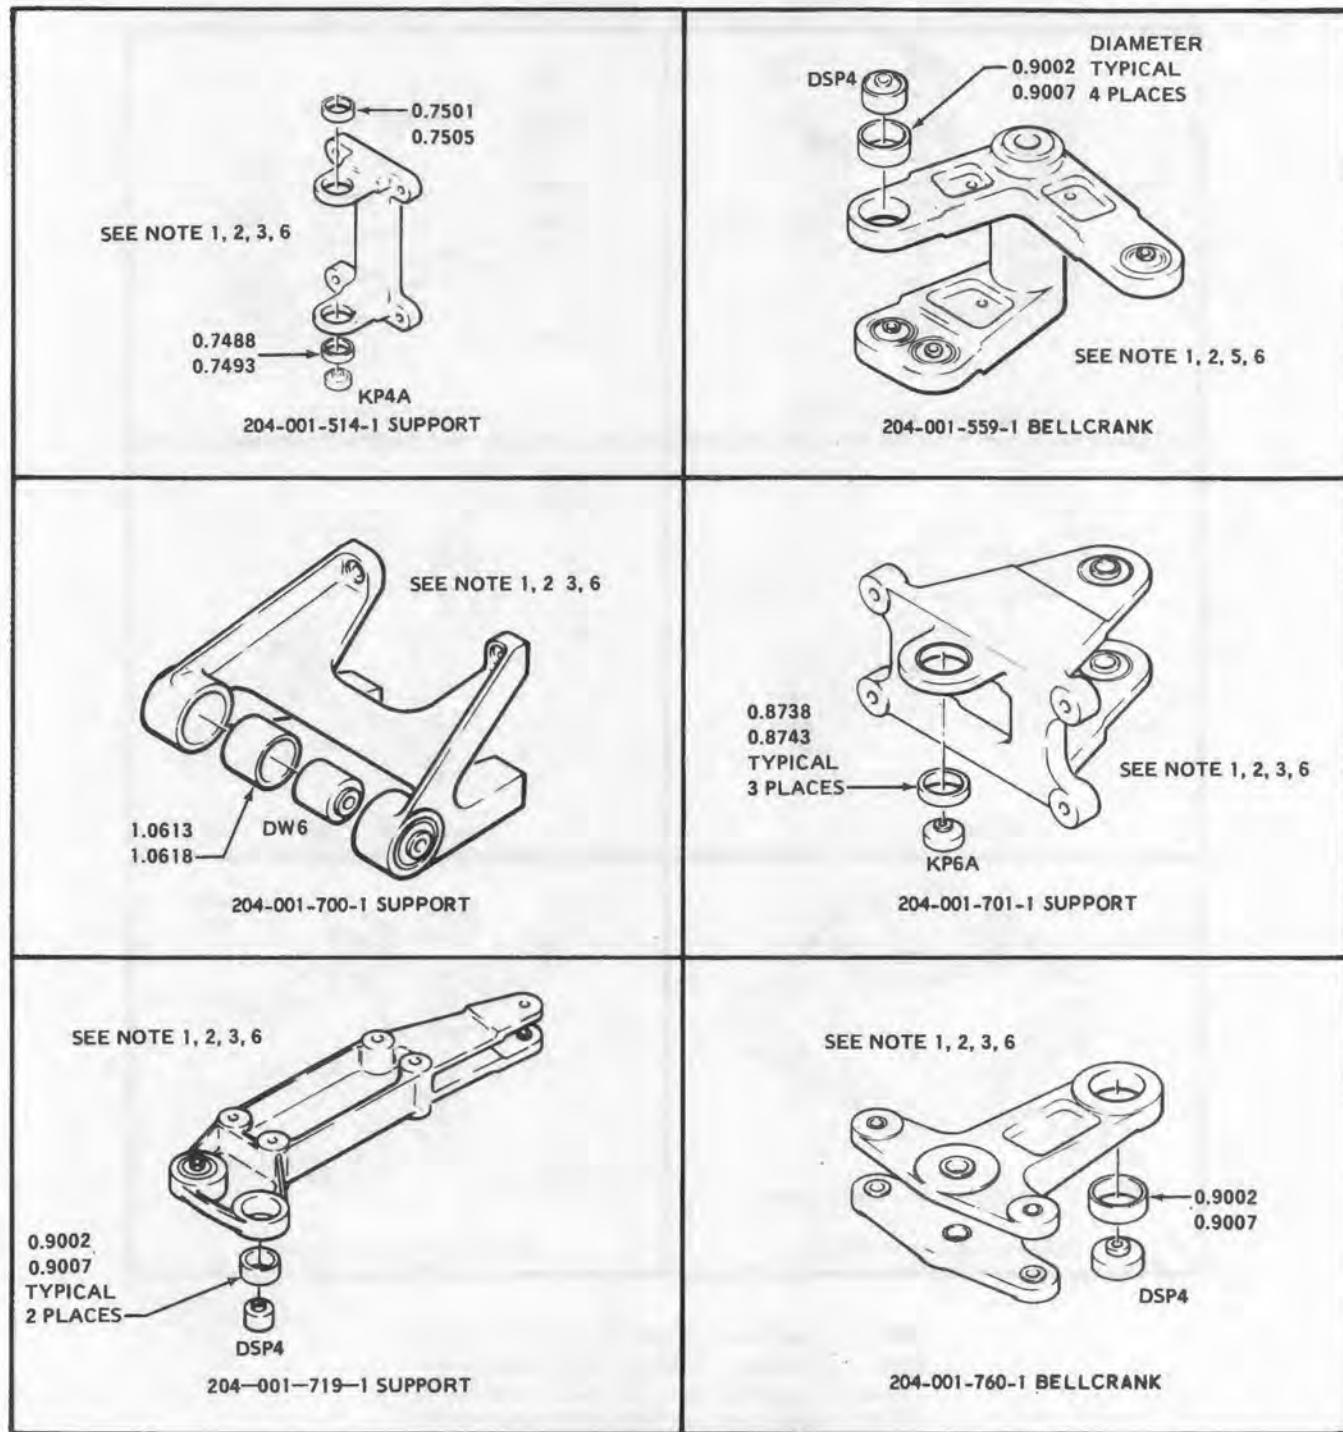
Bearing replacement (Sheet 1 of 7)
